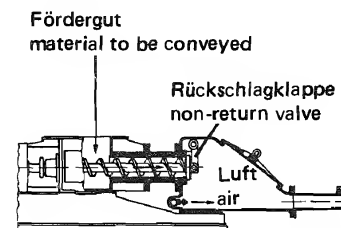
Fuller pump for feed-in of materials into a high-pressure
